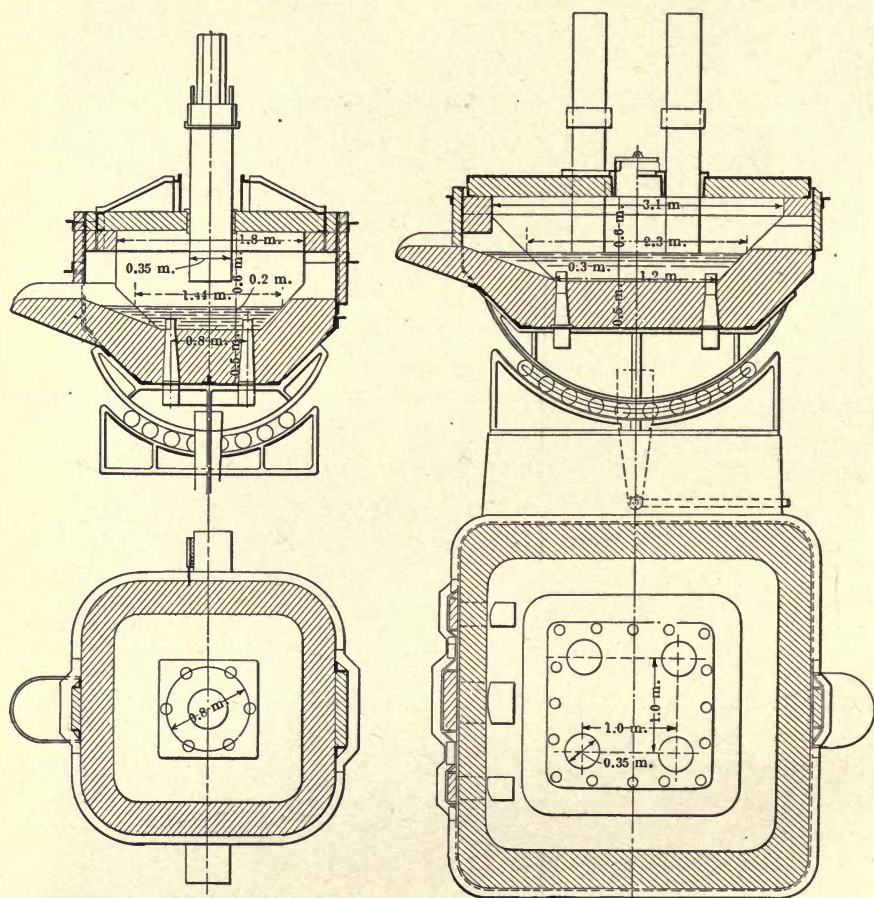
Plan and sectional elevation of 12-ton Girod electrical furnace.
